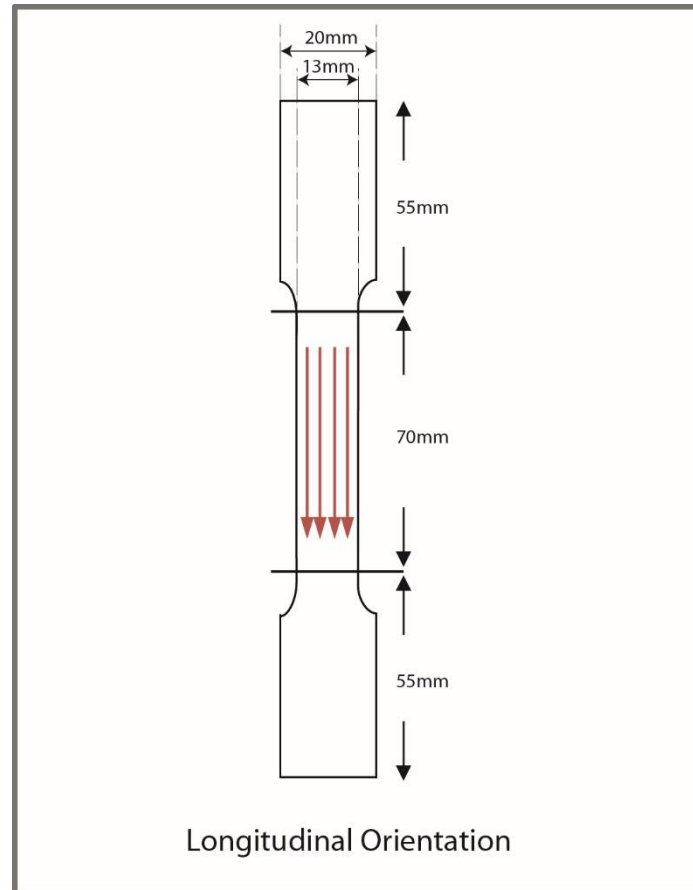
Specimen for tensile test (red arrows indicate the printing direction). Specimen thickness is 3 mm
